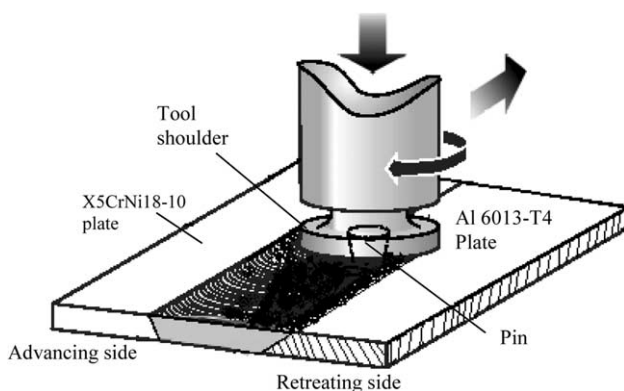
Schematic views illustrating the friction stir welding of dissimilar Al 6013-T4 to stainless steel (X5CrNi18-10).
